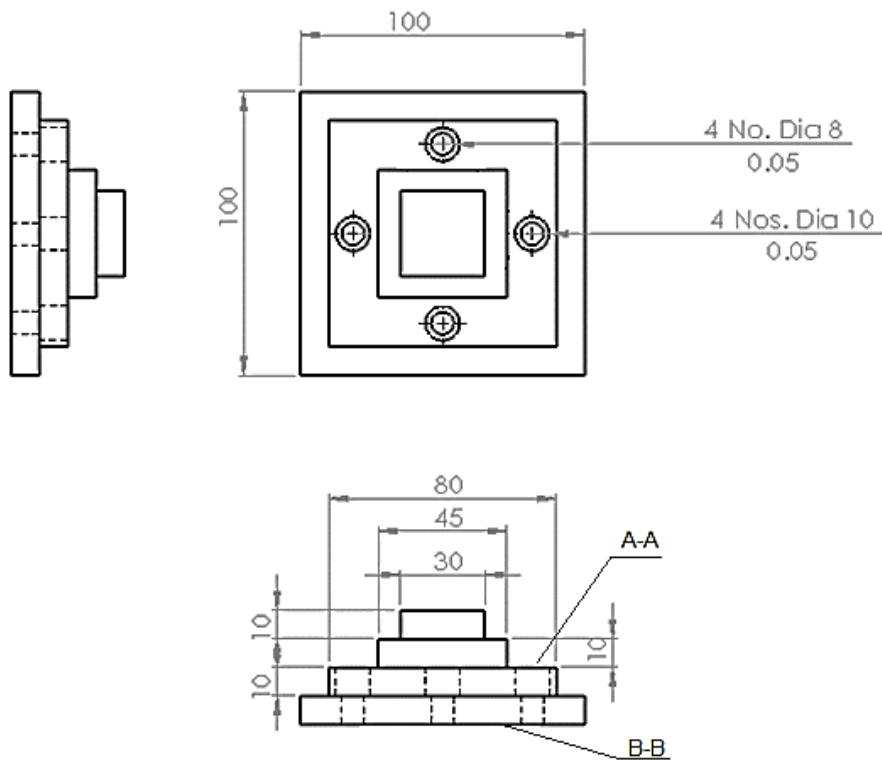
WORKPIECE DETAILED DESIGN
